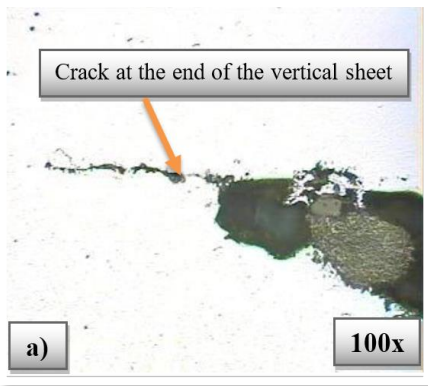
Stereo-microscope images of the fracture surface.
